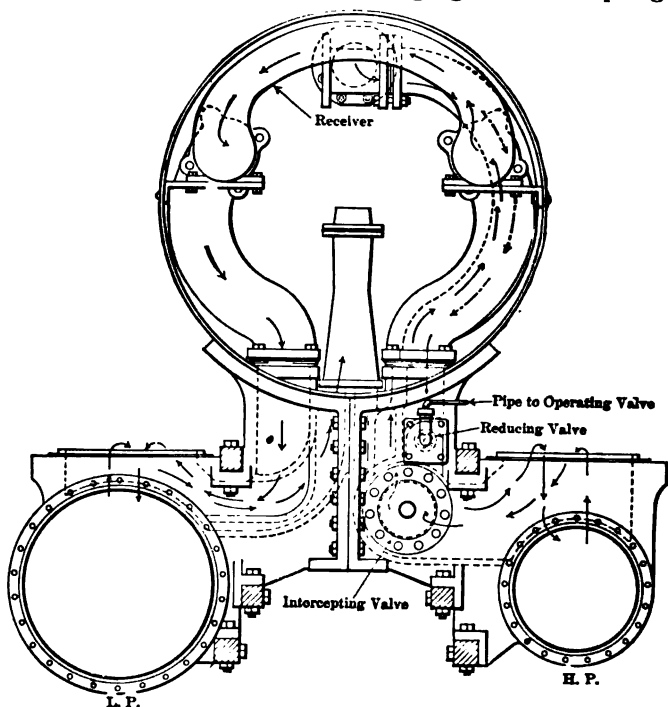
VIEW SHOWING RECEIVER AND STEAM-PIPE IN FRONT END.
